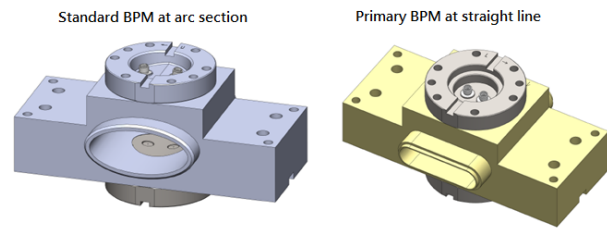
Mechanical drawings of standard type and primary type BPM for TPS storage ring.
